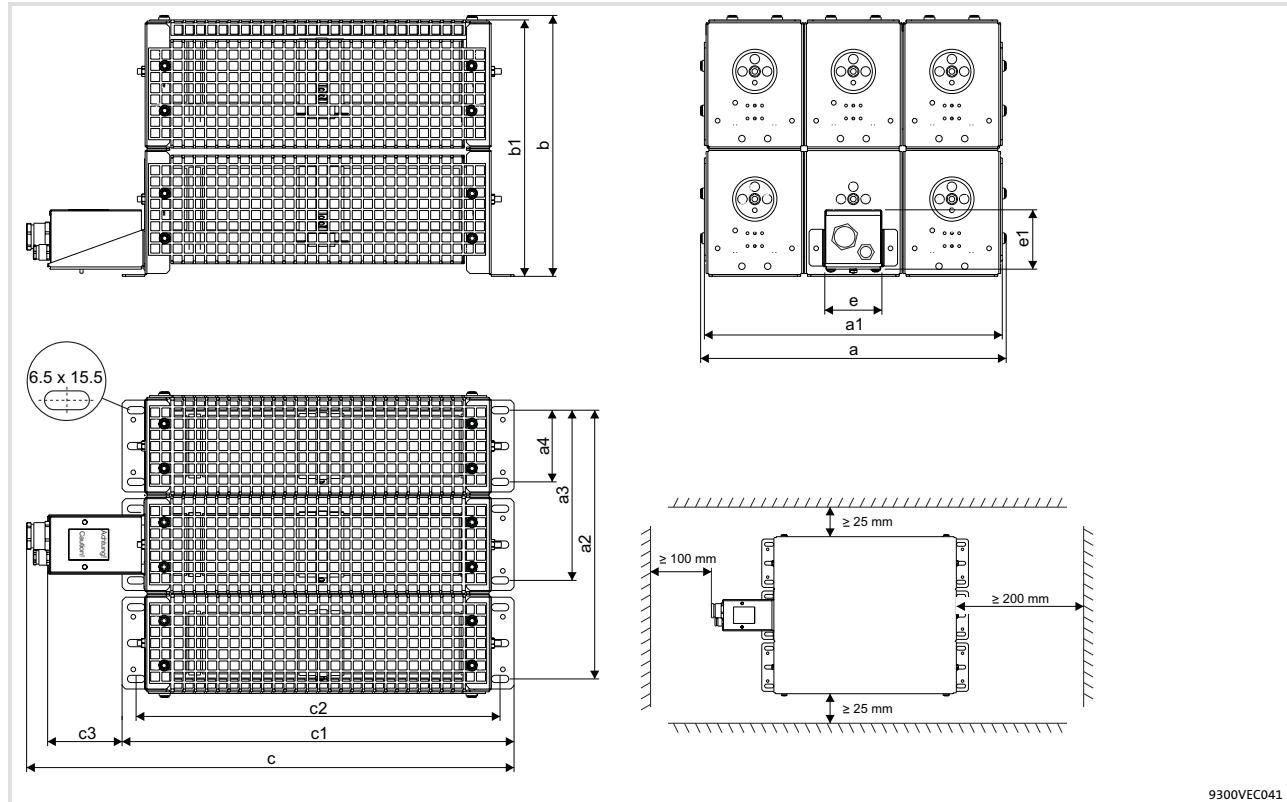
Dimensions of the ERBD015R04K0 brake resistor
